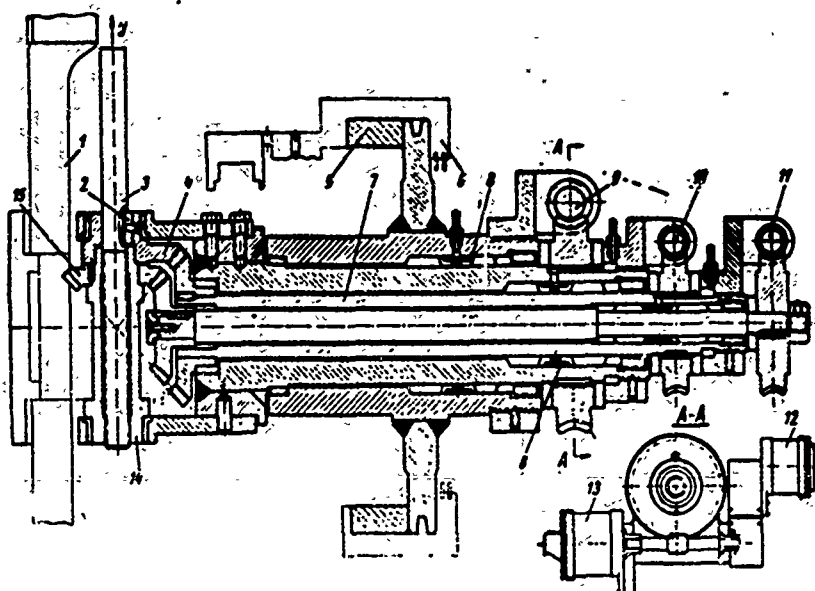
Traverse gear of experimental turbine 8T-3: 1 - diaphragm to be investigated; 2 - sliding key; 3 - rod; 4 - transmission gear pair; 5 - adjusting ring of axial position; 6 - turbine housing; 7 - bushing for movement of angle α_1 ; 8 - seal; 9 - worm gear of pitch drive x ; 10 - worm gear of angle of rotation α_1 ; 11 - worm gear for radial movement y ; 12 - indicator selsyn; 13 - electric-drive motor; 14 - drive bushing for movement y ; 15 - gear pair for movement y .
